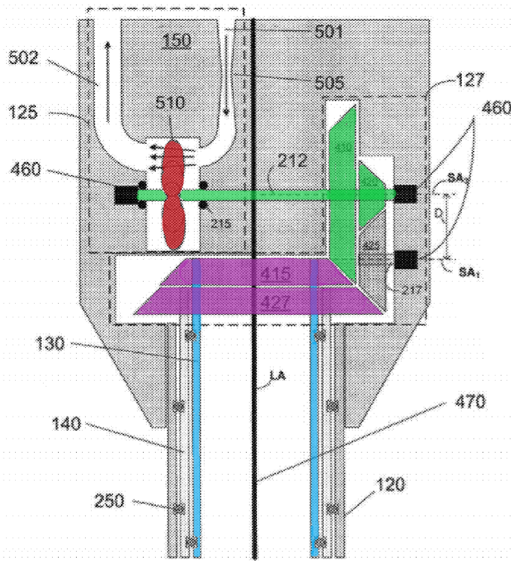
Schematic drawing of a mechanism to continuously drive both the cutter and the outer tube. Relevant components: 120 = housing, 130 = inner cutting tube, 140 = outer tube, 212 = drive shaft, 250 = ball bearing, 415 = angular gear driving inner cutter, 427 = angular gear driving the outer tube, 501 = pressurized air inlet, 510 = Turbine. Adapted from: [58]
